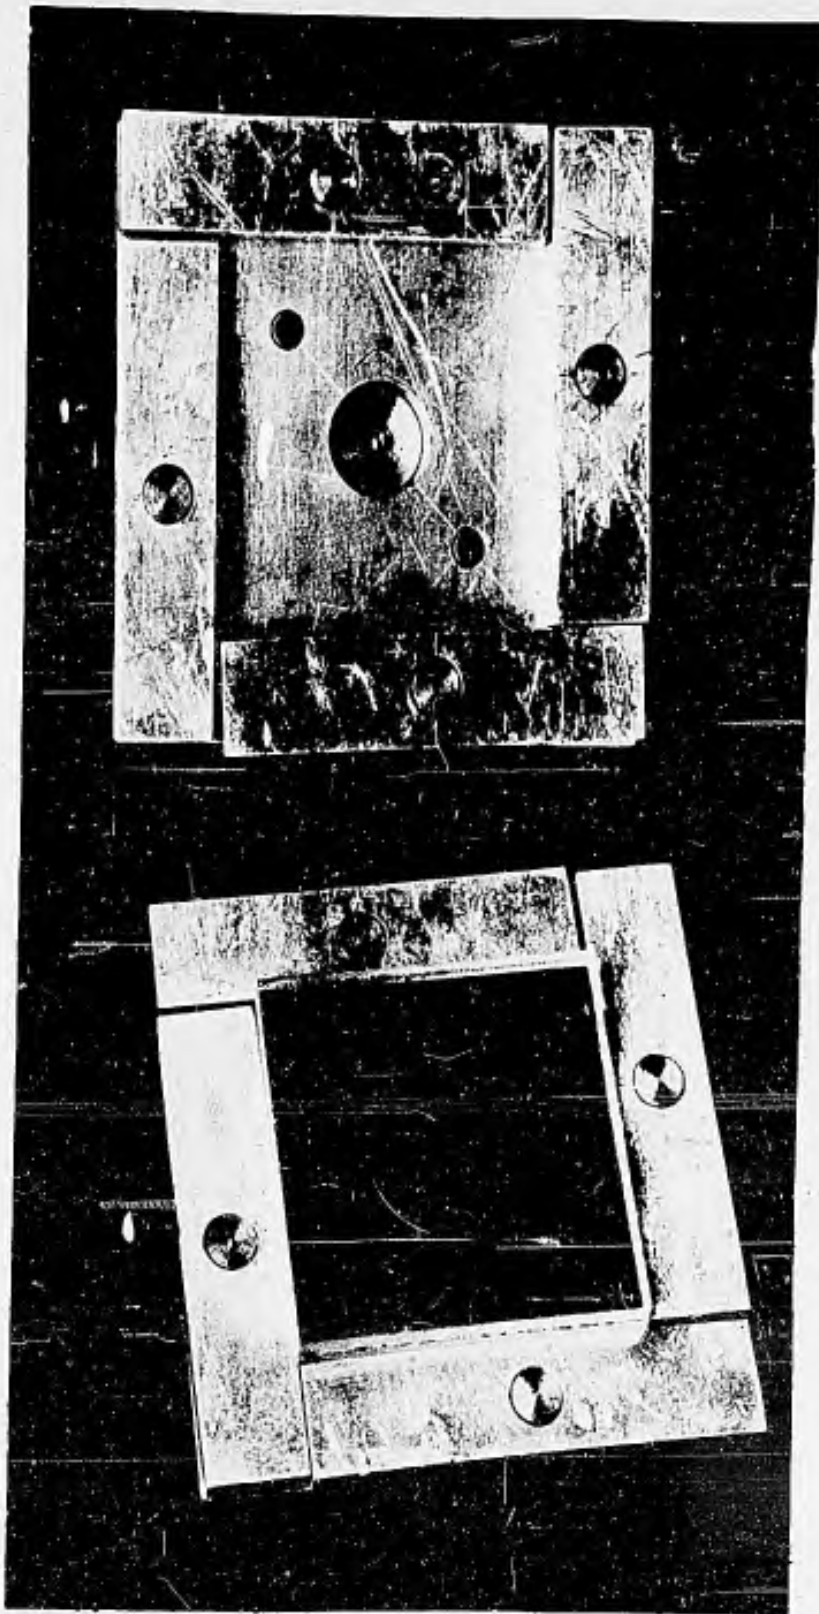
GRIPS FOR HOLDING SPECIMEN
